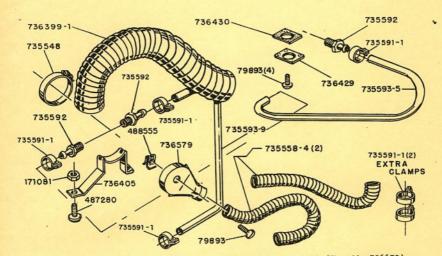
CONVERSION KIT FOR MODEL 735900 (Part No. 736679)
